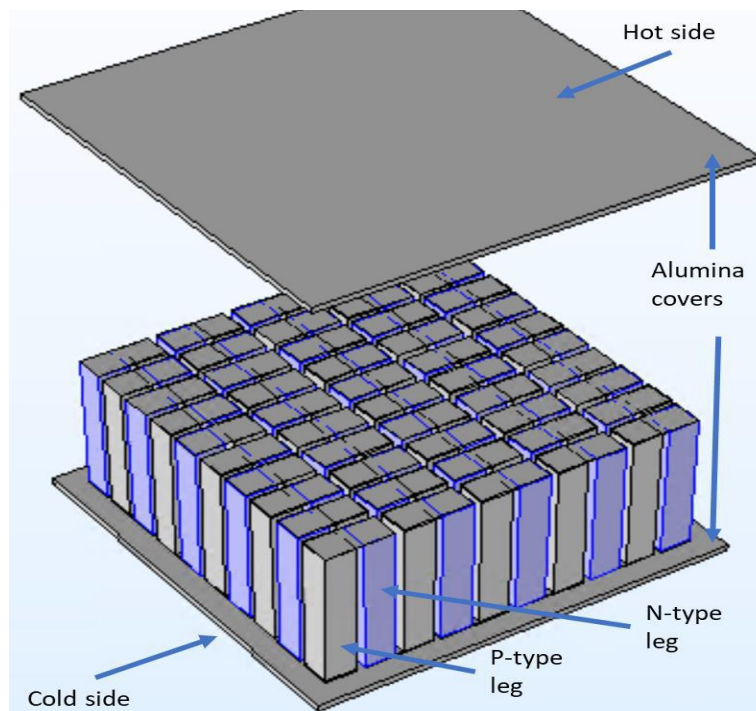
Design of a standard thermoelectric module. The top cover is exploded out to give a clear view of the makeup of the module. In reality, it would sit directly above the legs, just as the bottom plate sits directly below them.
